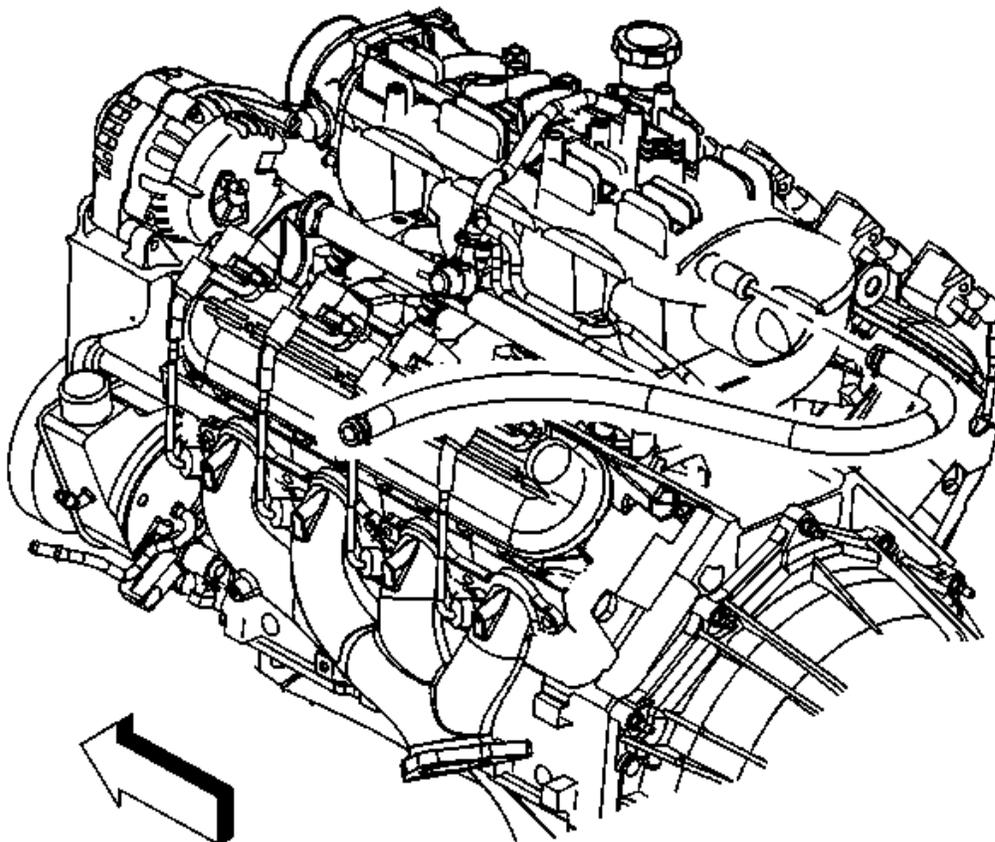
Disconnecting Vacuum Brake Booster Hose (4.8L, 5.3L, 6.0L)
